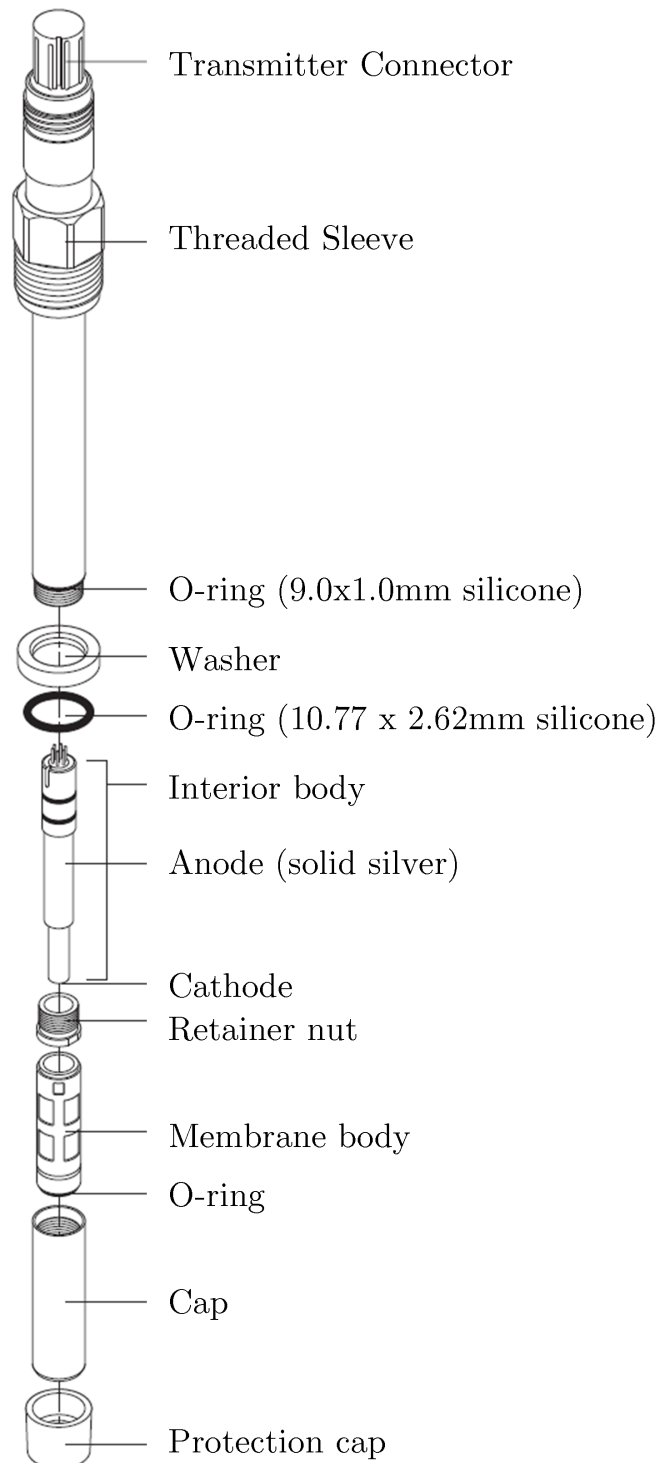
12mm Mettler Toledo® Inpro® 6800 Dissolved Oxygen Probe Exploded View (Toledo, 2013)
